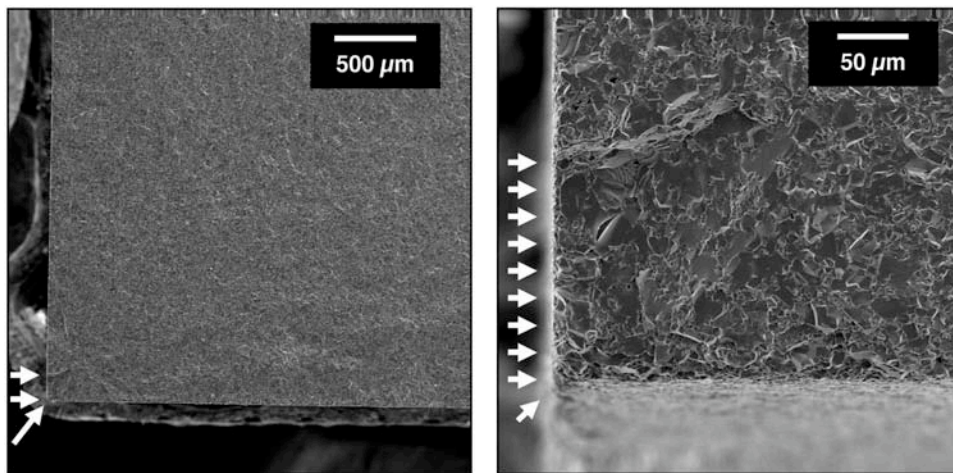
Fracture surface of an As-Received, CoorsTek ground, unchamfered, ASTM C1161B bend showing (left) failure at the corner and (right) higher magnification image of the location containing the strength-limiting flaw.
